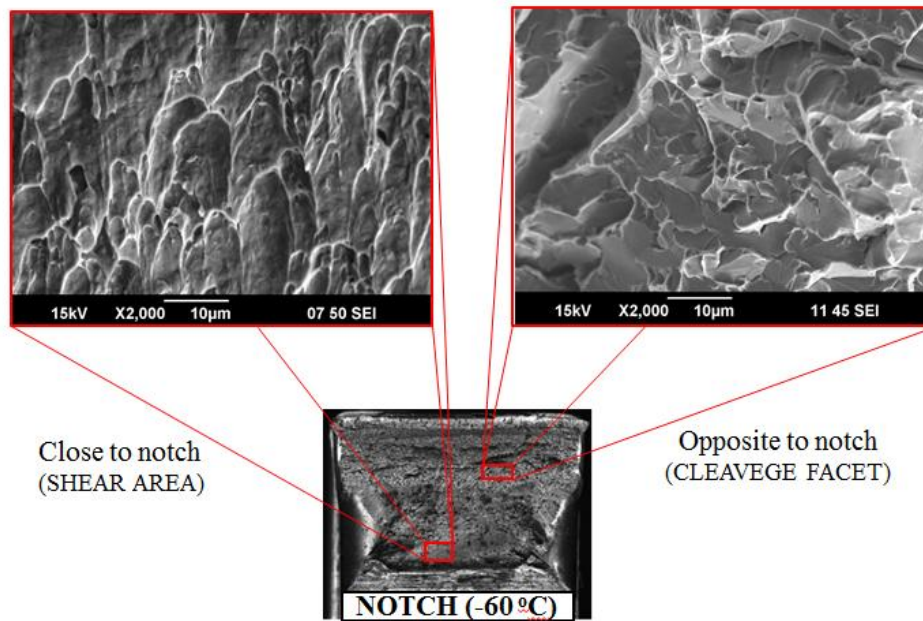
Fracture surface for 10 mm thick CVN specimen at -60°C .
